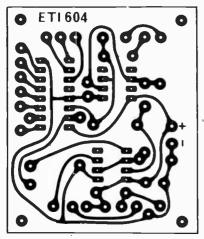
Printed circuit layout. Full size 60 x 50 mm.
